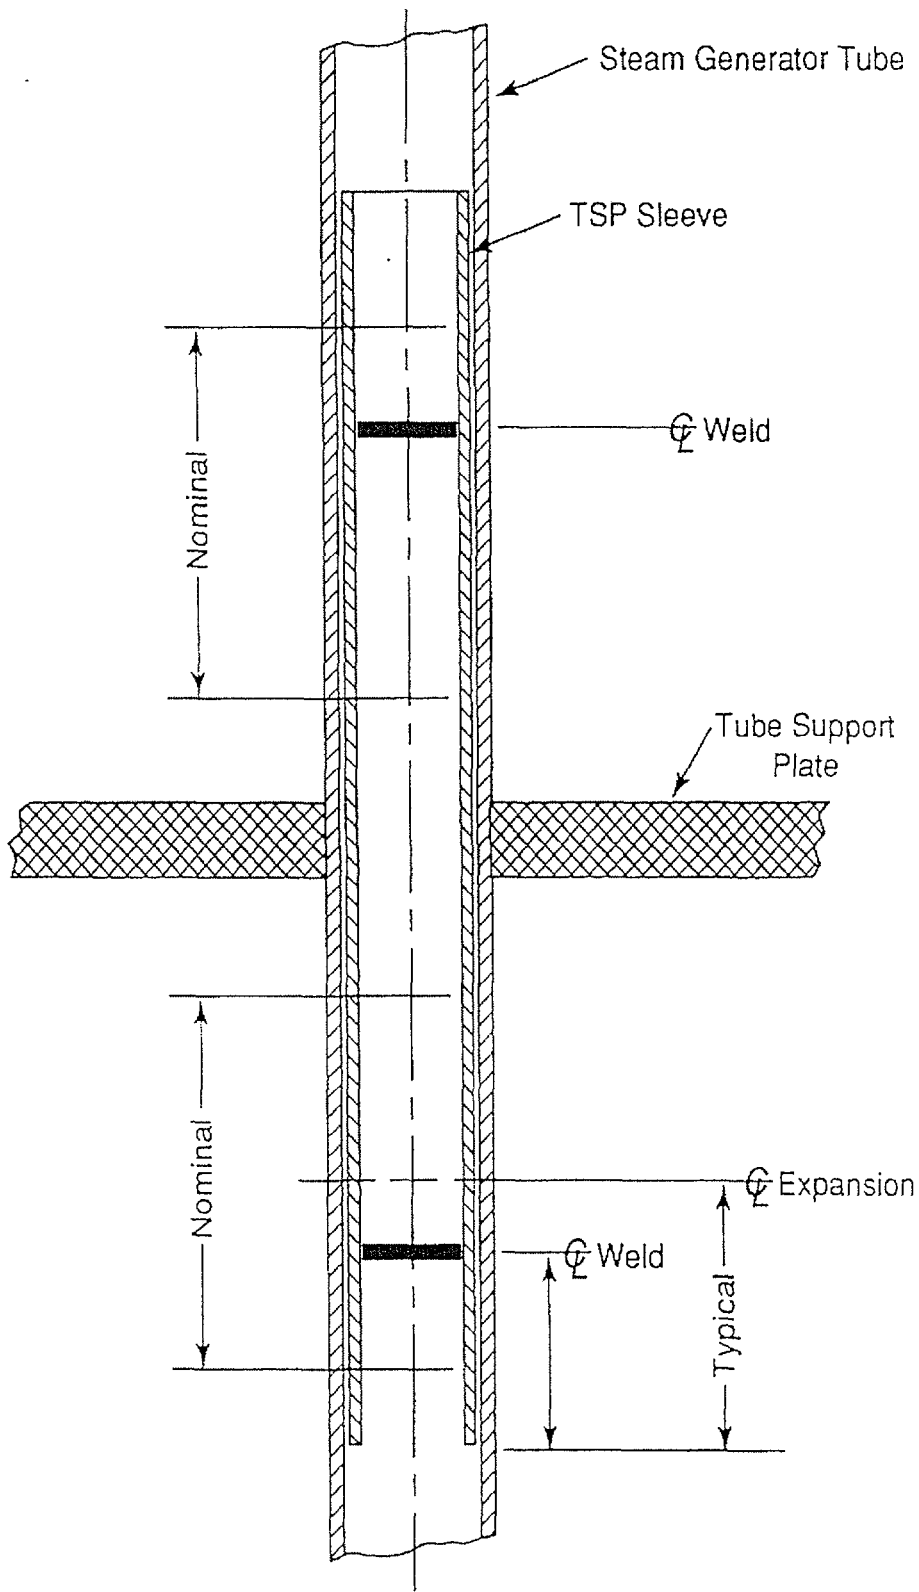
ABB CE Tube Support Plate Sleeve Installation.
